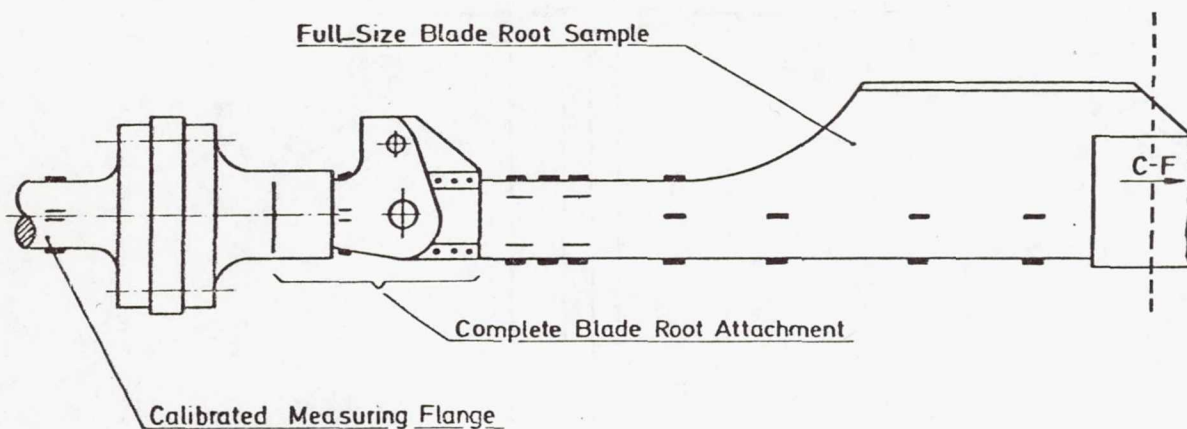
Glass/epoxy BO-105 rotor blade (from ref. 62).
